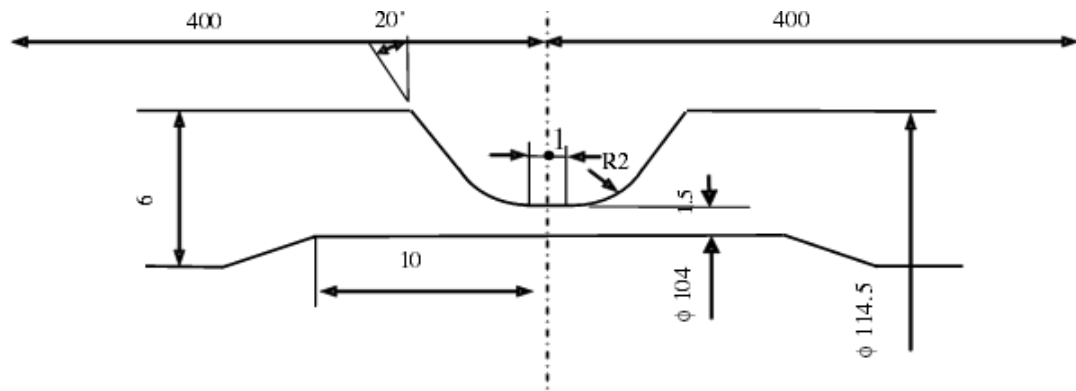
Pipe and groove dimensions in mm (Deng and Murakawa, 2006).
